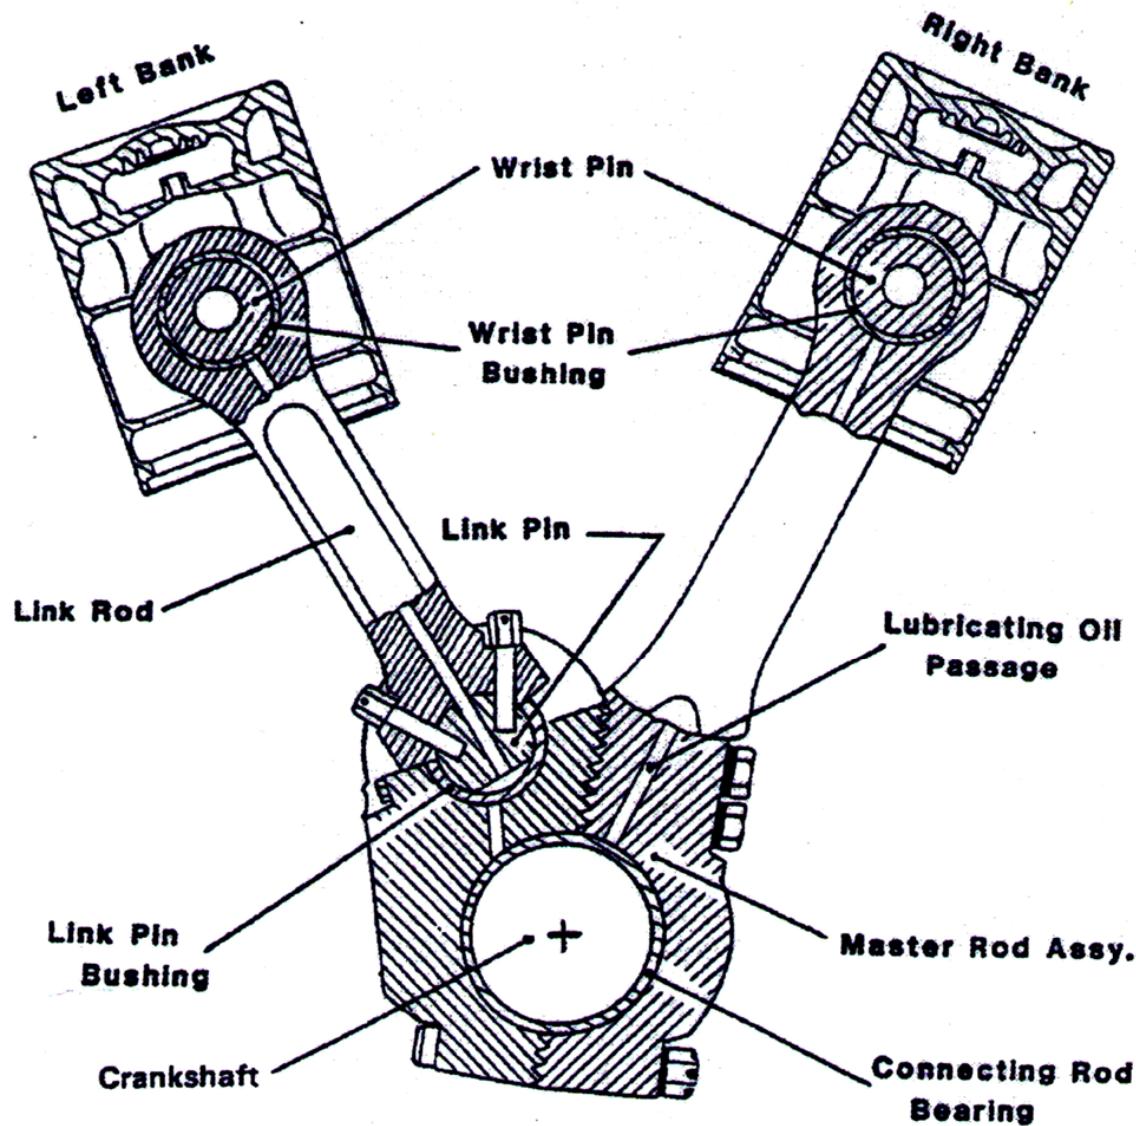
DeLaval Engine Articulating Connecting Rod Assembly
